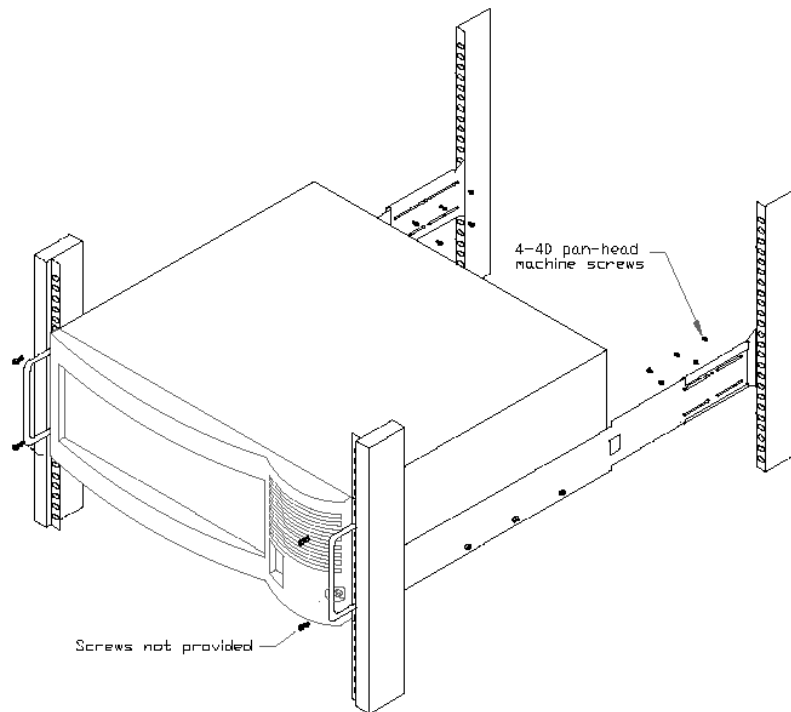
Mounting the VSR-2 Chassis in the Rack
